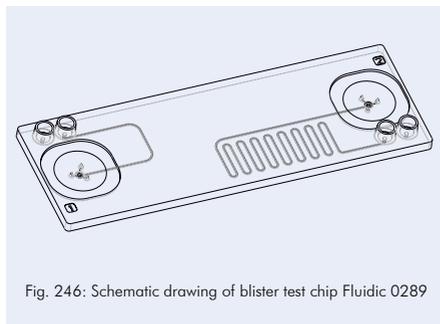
Schematic drawing of blister test chip Fluidic 0289
